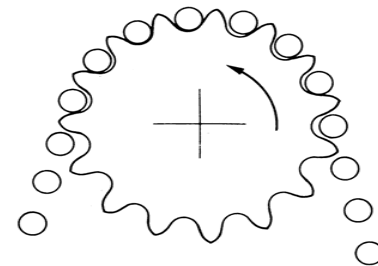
The Engagement Between a Sprocket and an Elongated Chain
